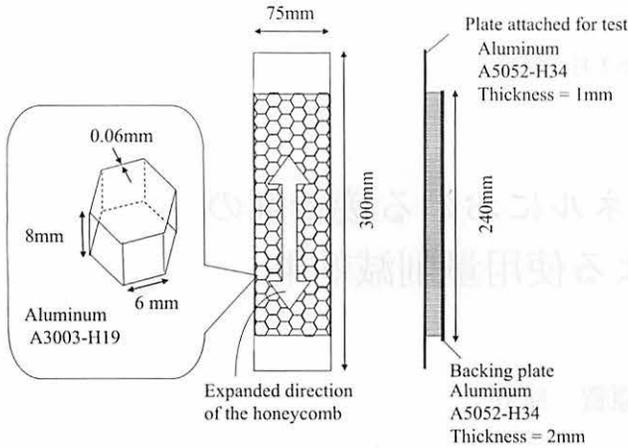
Shape and dimensions of honeycomb and specimens for peeling test.
